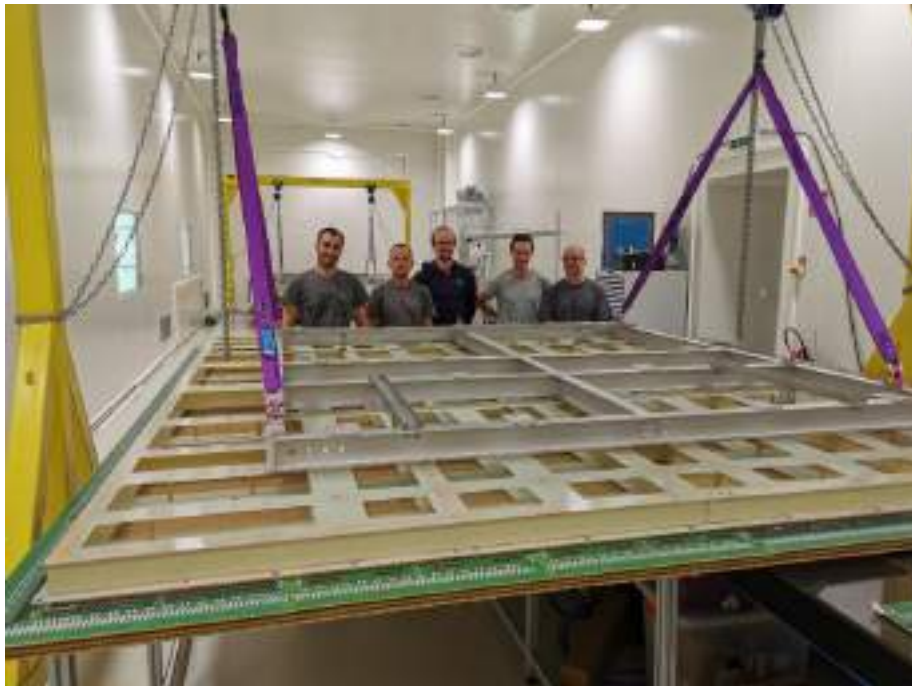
Finalized CRP-3 assembly inside the clean room at CERN building 185 and some of the CRP assembly team.
